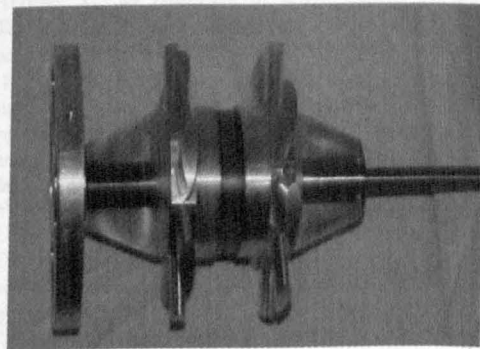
Second fabricated turbine rotor (simulated) - including one bearing mounting on left hand side
